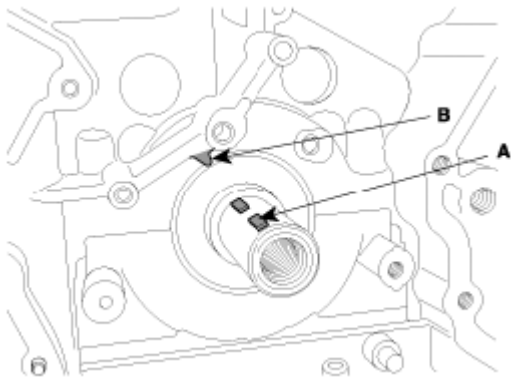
Identifying Key Of Crankshaft And Timing Mark Of Timing Chain Cover
